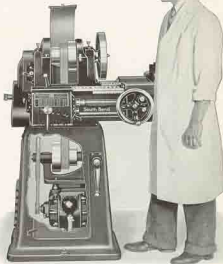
Front View of Underneath Belt Motor Drive Lathe with Door Cut Away to Show Driving Mechanism.
